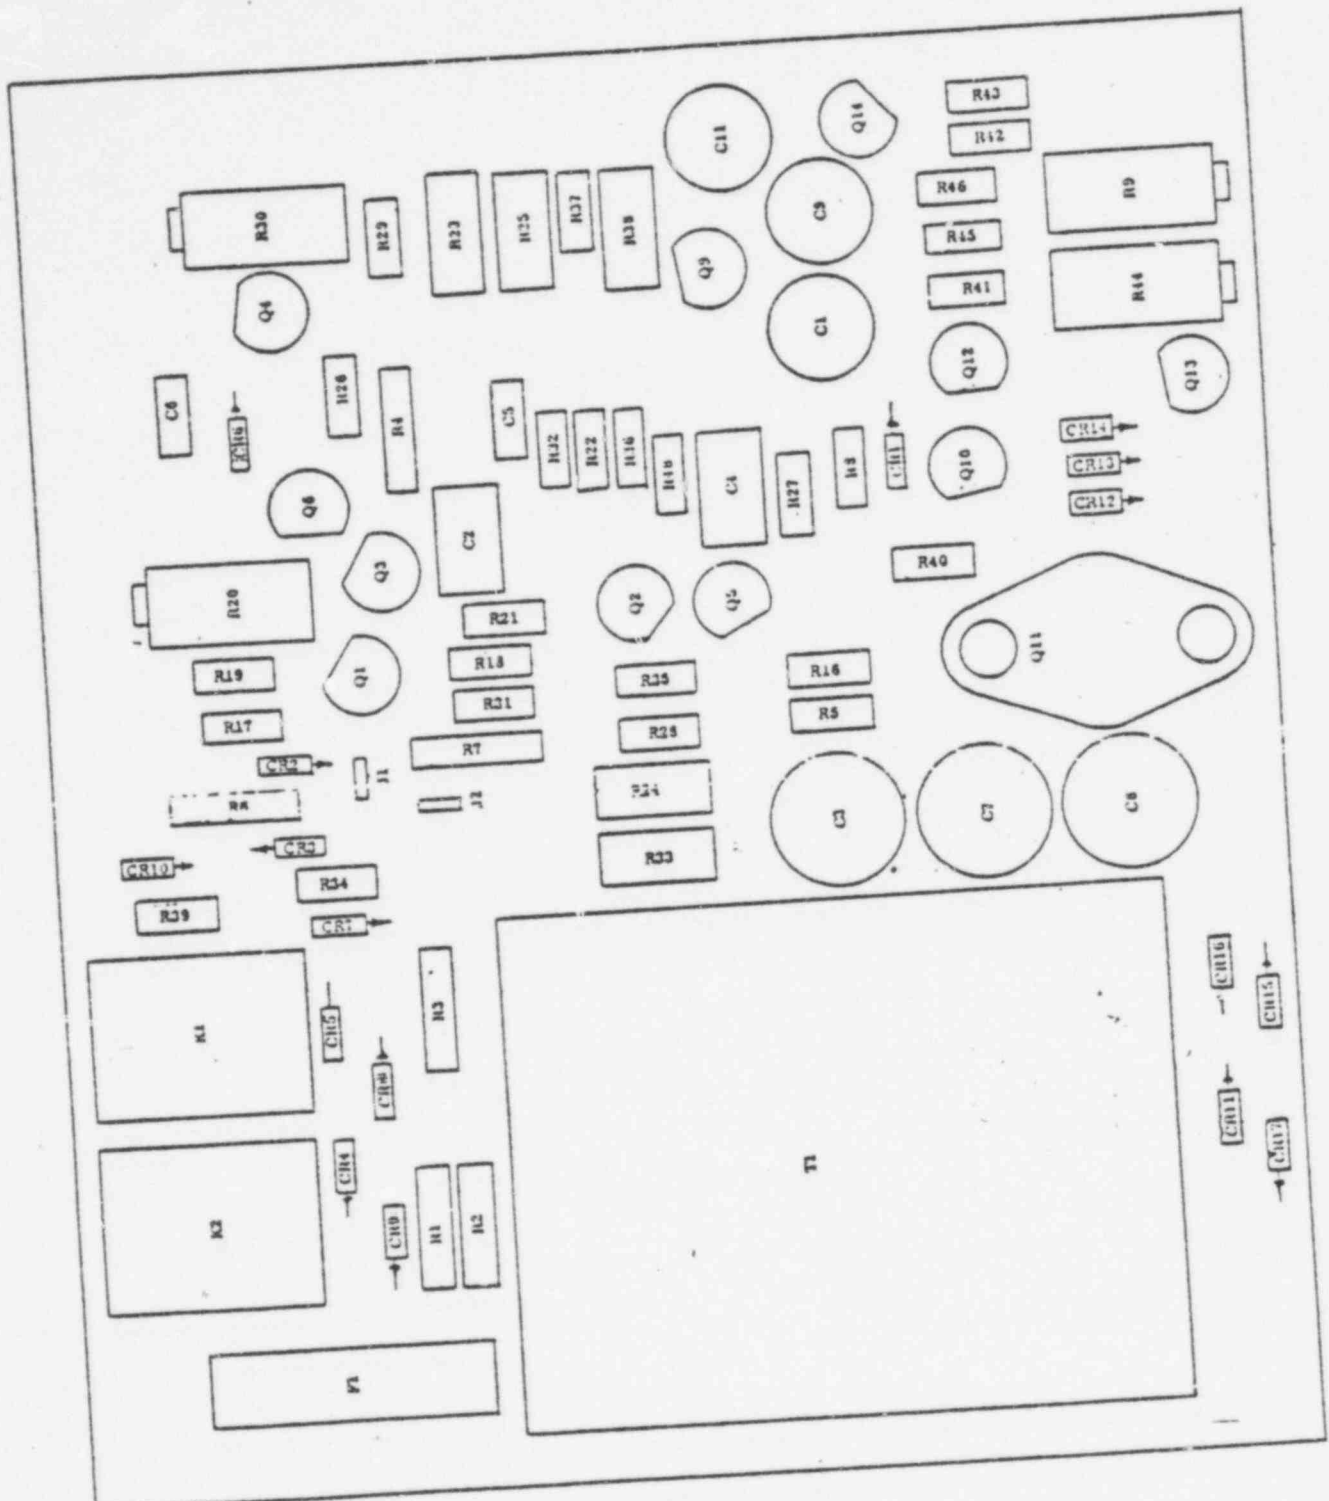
Model 846-1 Readout Module Circuit Board Assembly
